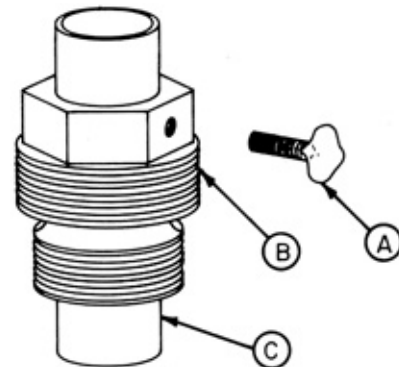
Bung Adaptor: (A) Thumb Screw, (B) Bung Adaptor, (C) Suction Pipe.
